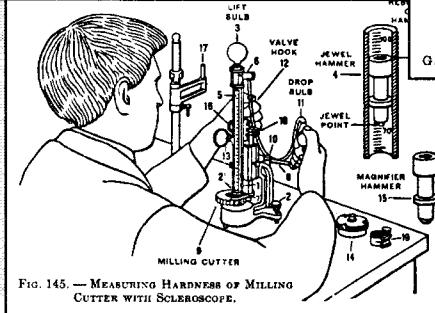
MEASURING HARDNESS OF MILLING CUTTER WITH SCLEROSCOPE.
